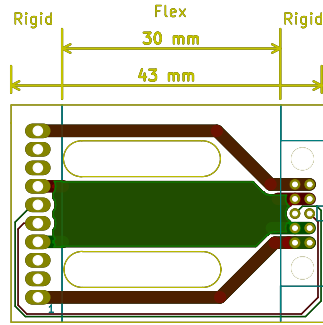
C-S2m-HHL flex cable for attaching the HHL package to the S-2m PCB
